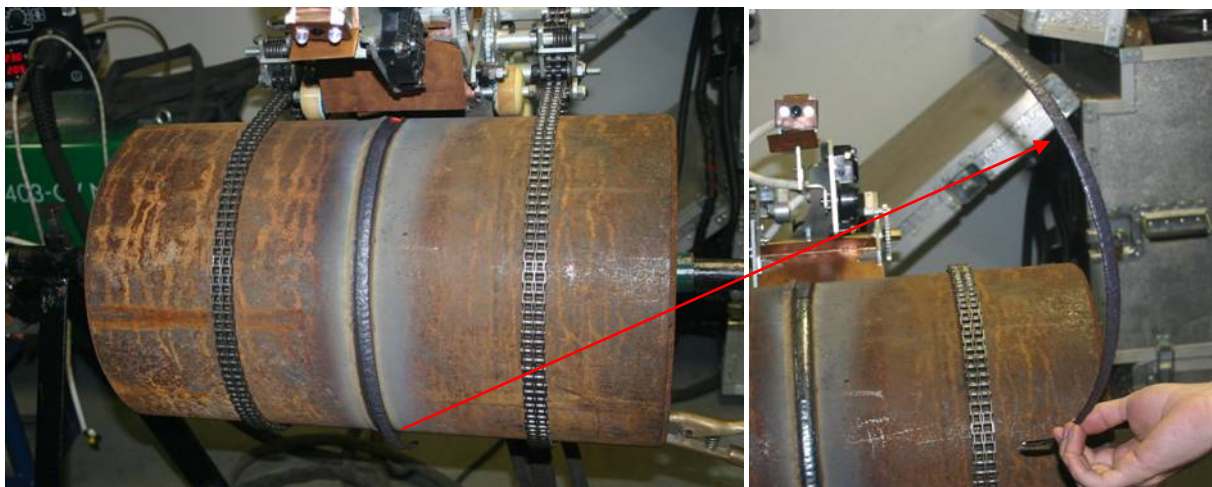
Finishing pass made with robotic system. Detail to the slag.
